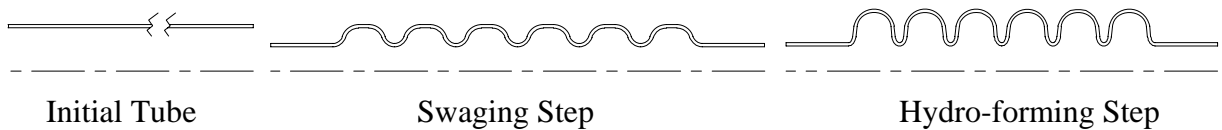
Fabrication steps of weld-free multi-cell cavity.
